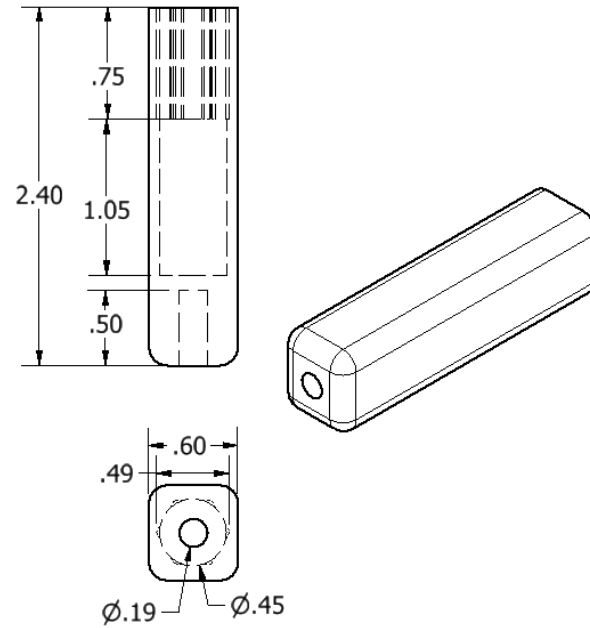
Solenoid housing for Mark 1 grabber. Dimensions in inches.
